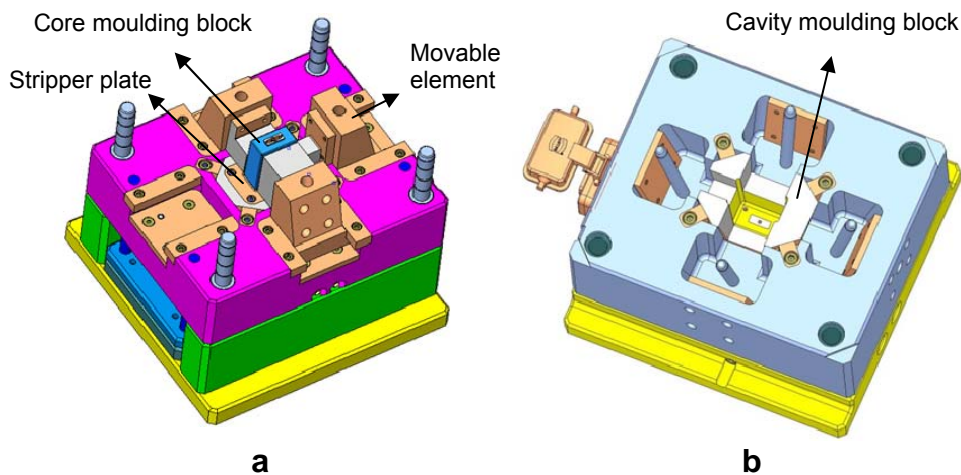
HM-2 standard design: a) ejection side, b) injection side
